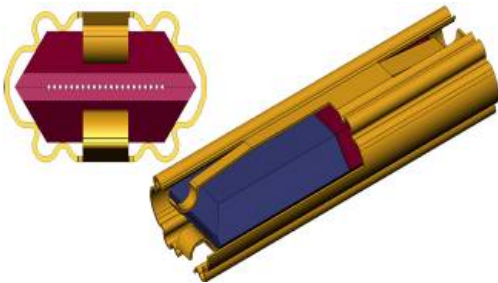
Two connector elements shown mated inside sleeve – end view (left) and isometric view with cutout showing preload beam (right)
